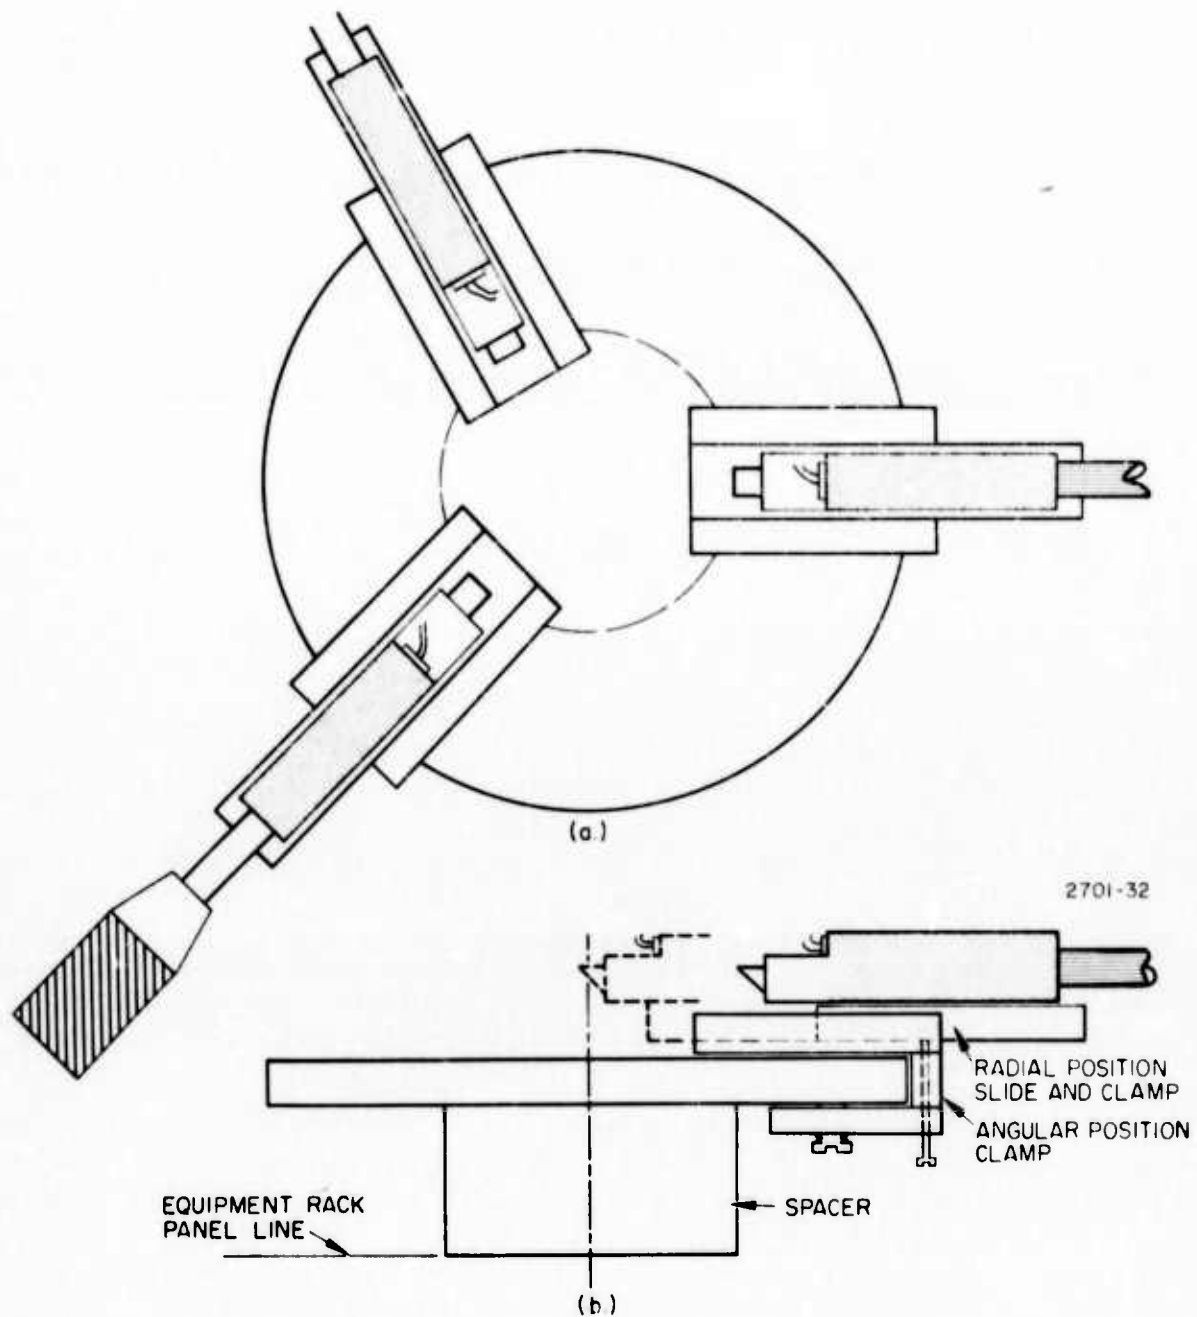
Glint positioning mechanism showing three glint modules. (a) As seen by transmitter. (b) Side view showing how modules are moved.
